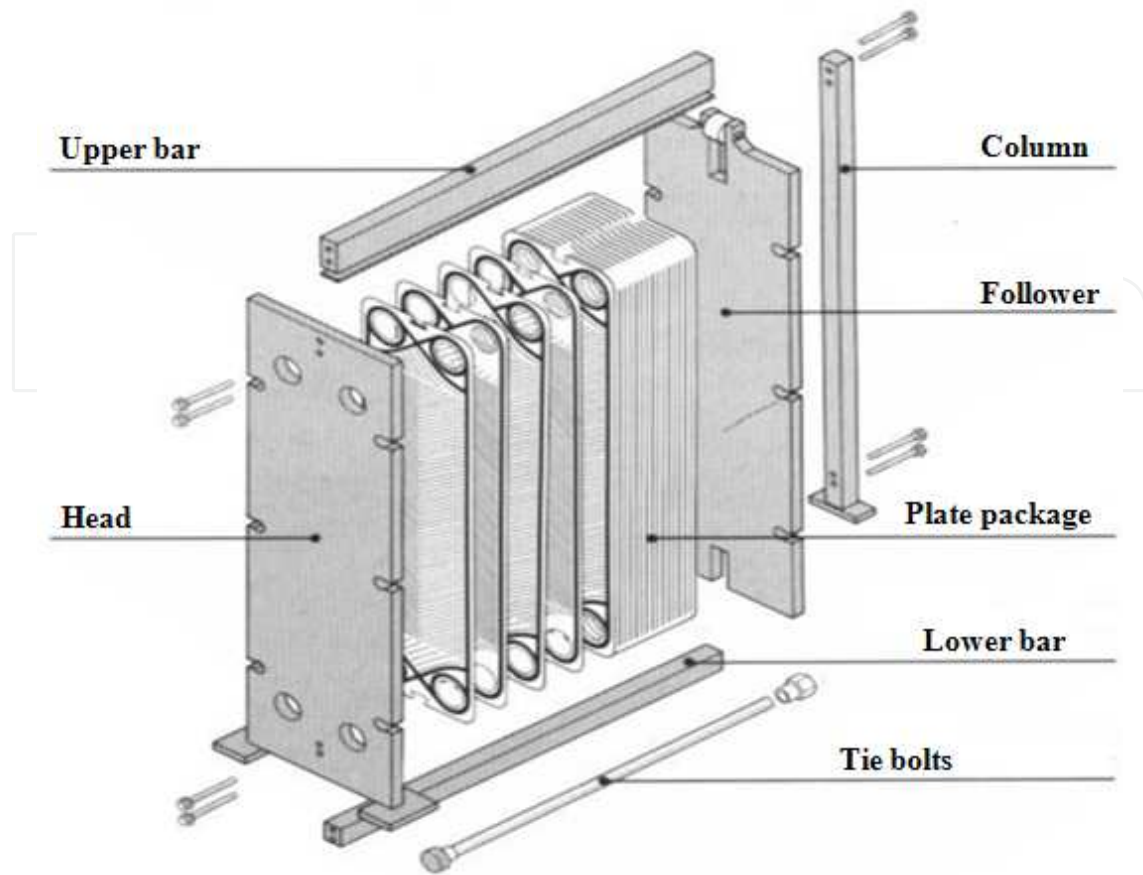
Exploded View of a Plate Heat Exchanger [2].
